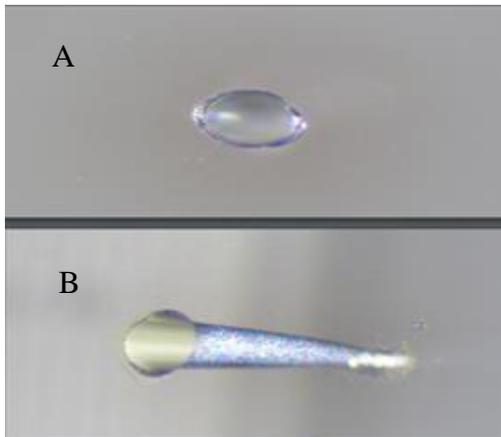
Laser drilled holes in glass ampoule. A is top view and B is side view (Mahler *et al.*, 2019).
